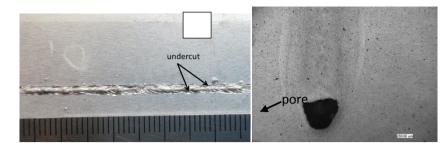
the defects of the weld joint: (a) underct,(b)pore.
